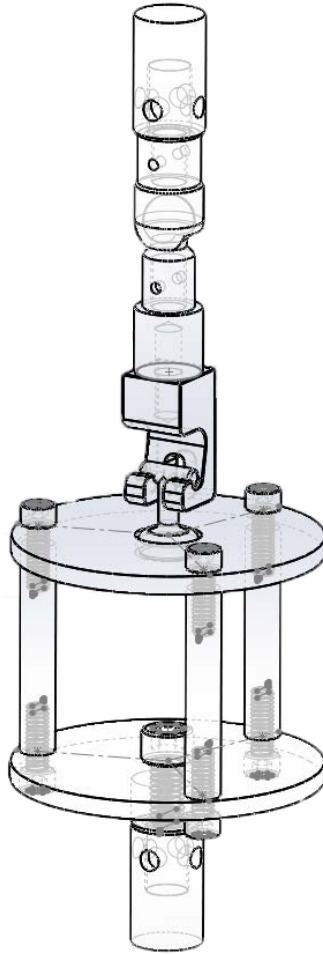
Final fixture iteration assembly schematic. Schematic models of the Instron grips are included for test fitting purposes.
